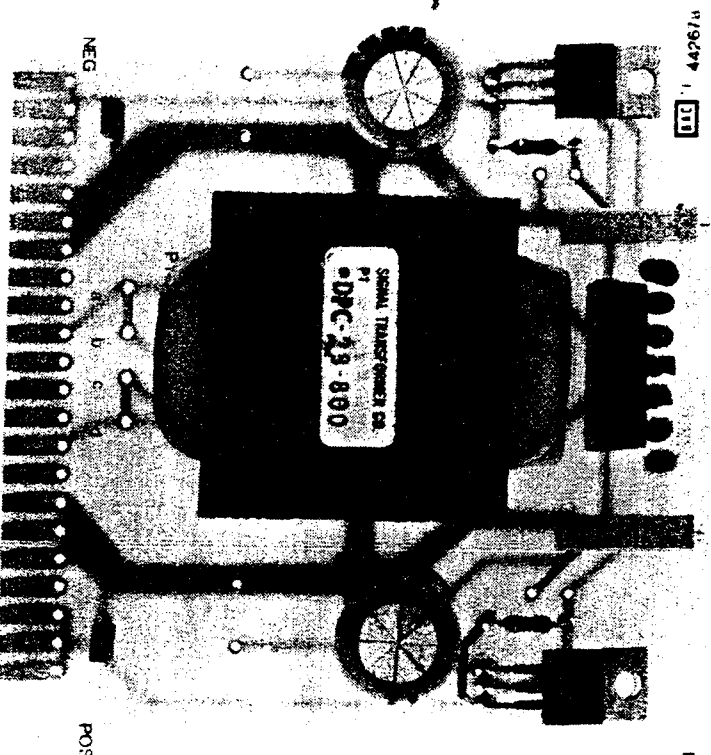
Regulated Power Supply Circuit Card Assembly
